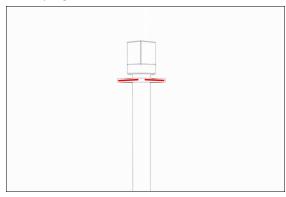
Convex side of the spring washer toward the drawbar head.
